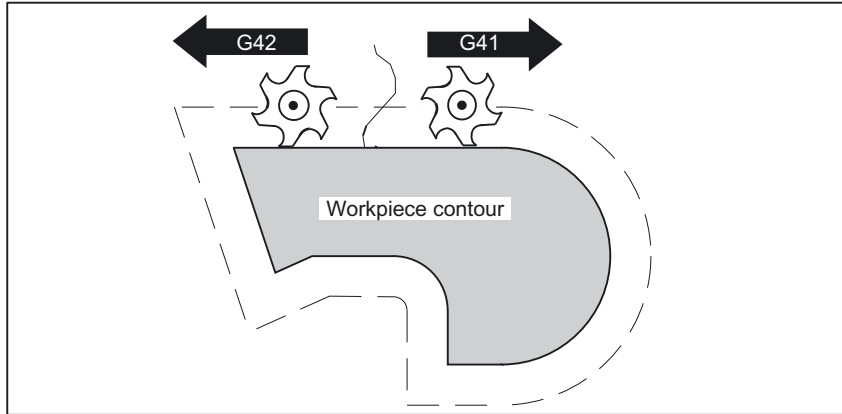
Milling cutter radius compensation to the right-left of the contour
